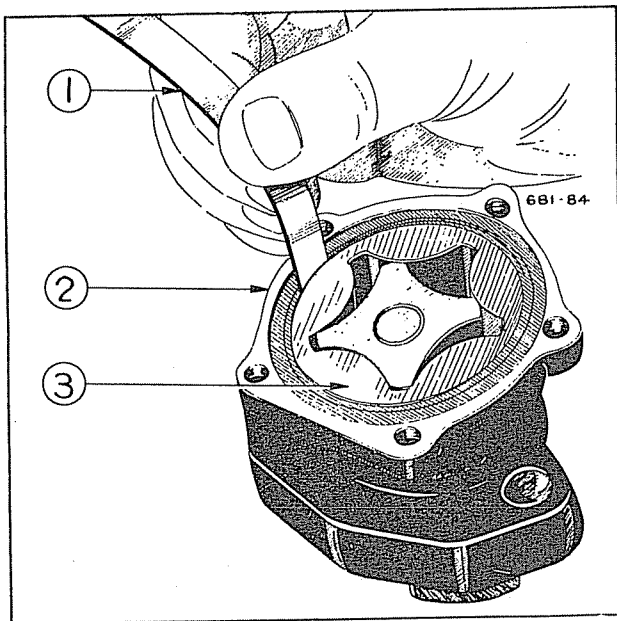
Measuring Clearance Between Outer Rotor and Body.
